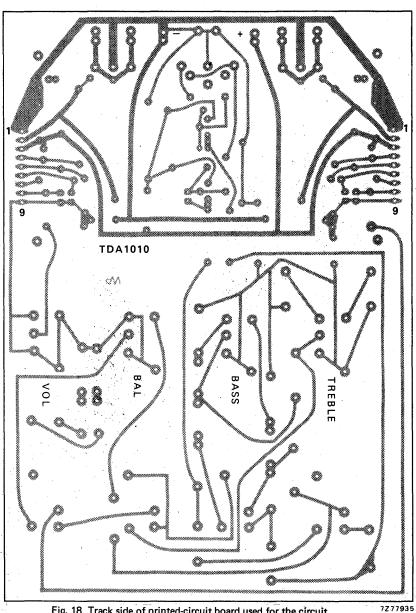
Track side of printed-circuit board used for the circuit of Fig. 17 (Fig. 16 partly); p.c. board dimensions 169 mm x 118 mm.
